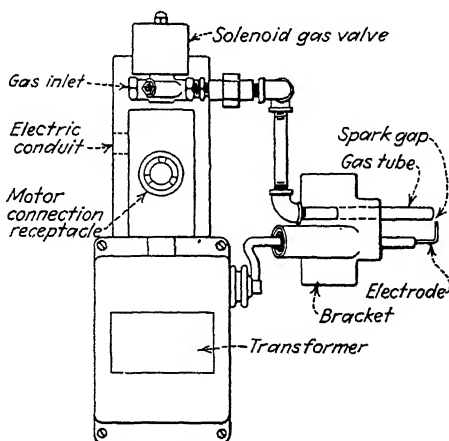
Electric-gas ignition assembly. (Courtesy of Ace Engineering Company.)
